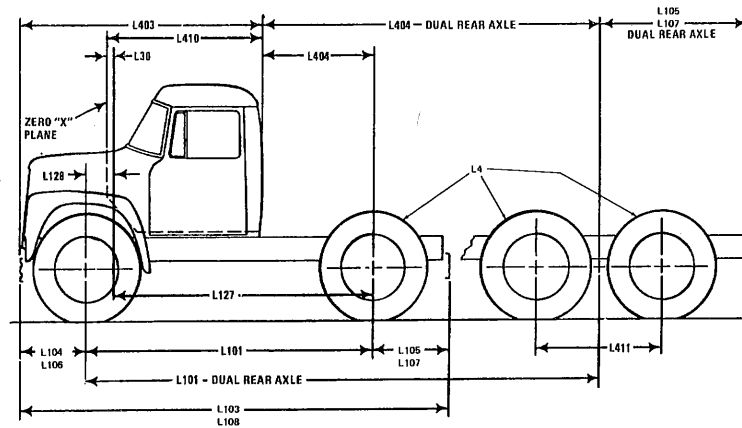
EXTERIOR DIMENSIONS, LENGTH—TRUCK
